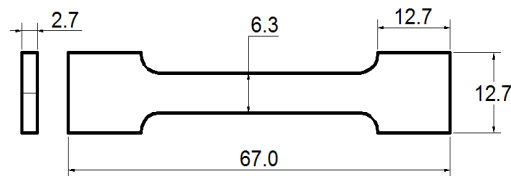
Injection mold part and geometry. All dimensions are in mm.
